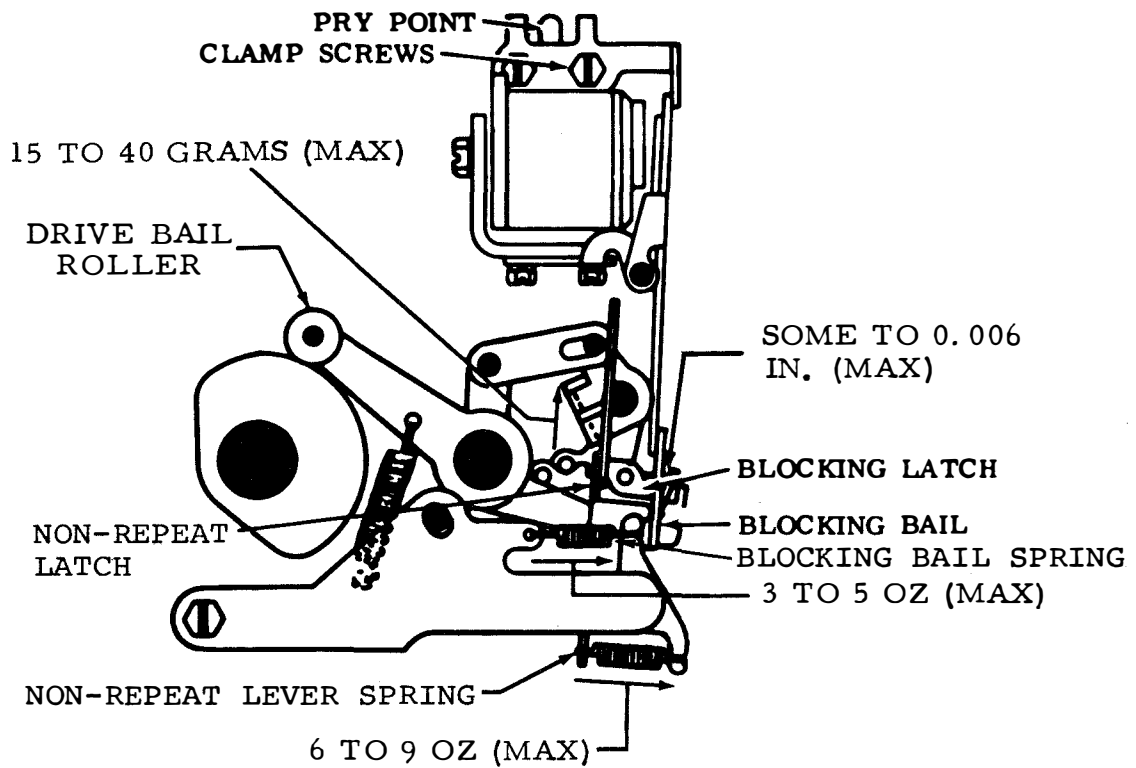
Blocking Latch Torsion Spring, Blocking Bail Spring, Non-repeat Lever Spring, and Armature Backstop, Reperfocator, Front View
